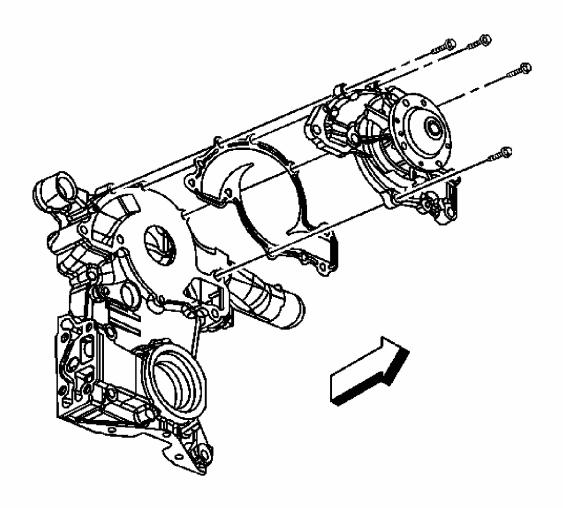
Removing/Installing Water Pump Assembly Courtesy of GENERAL MOTORS CORP.
